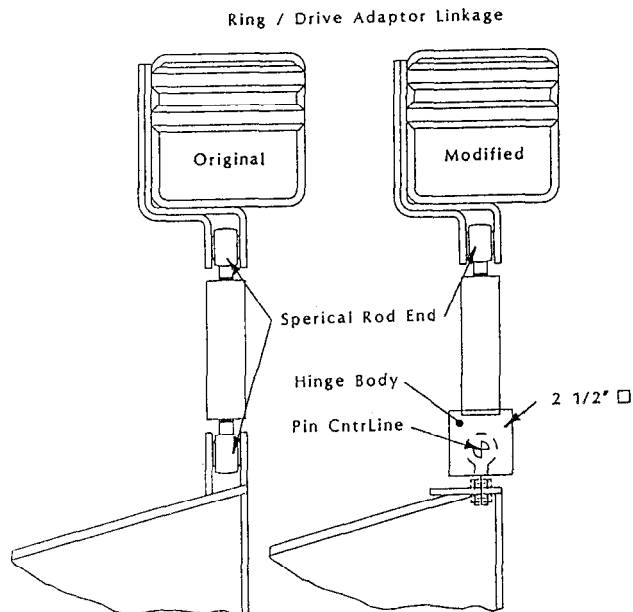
Cross Section of Dish Ring Showing Original and Modified Ring to Drive Adapter Attachment Components.
